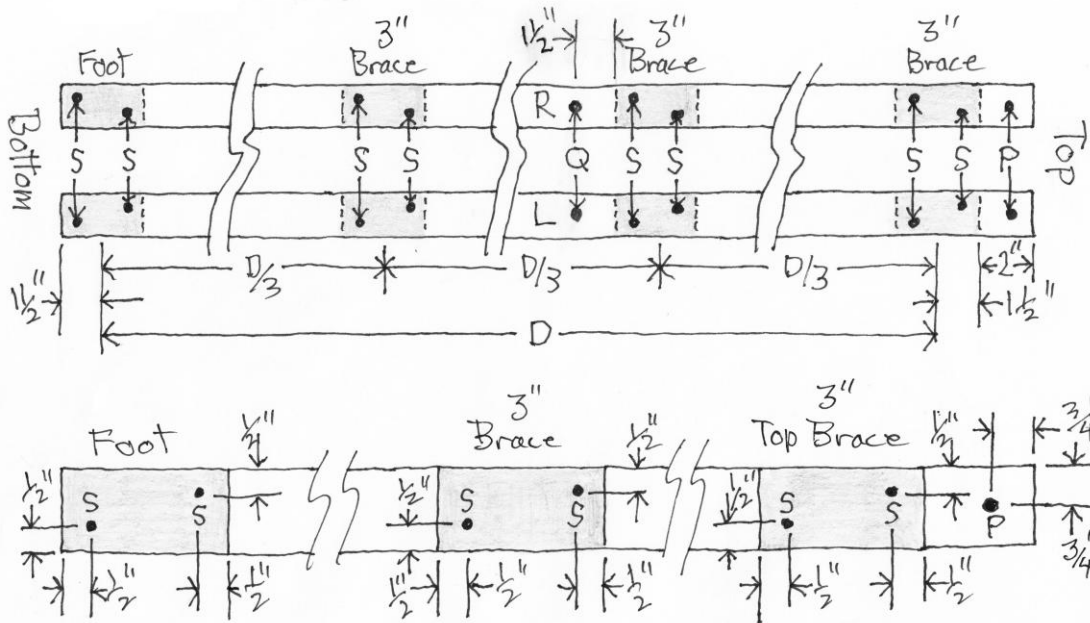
Top two drawings - pattern for drilling the holes in the six long pieces of wood that will make up the three legs of the tripod; Bottom drawing - details of the pattern for drilling the holes in the six long pieces of wood that will make up the three legs of the tripod.
